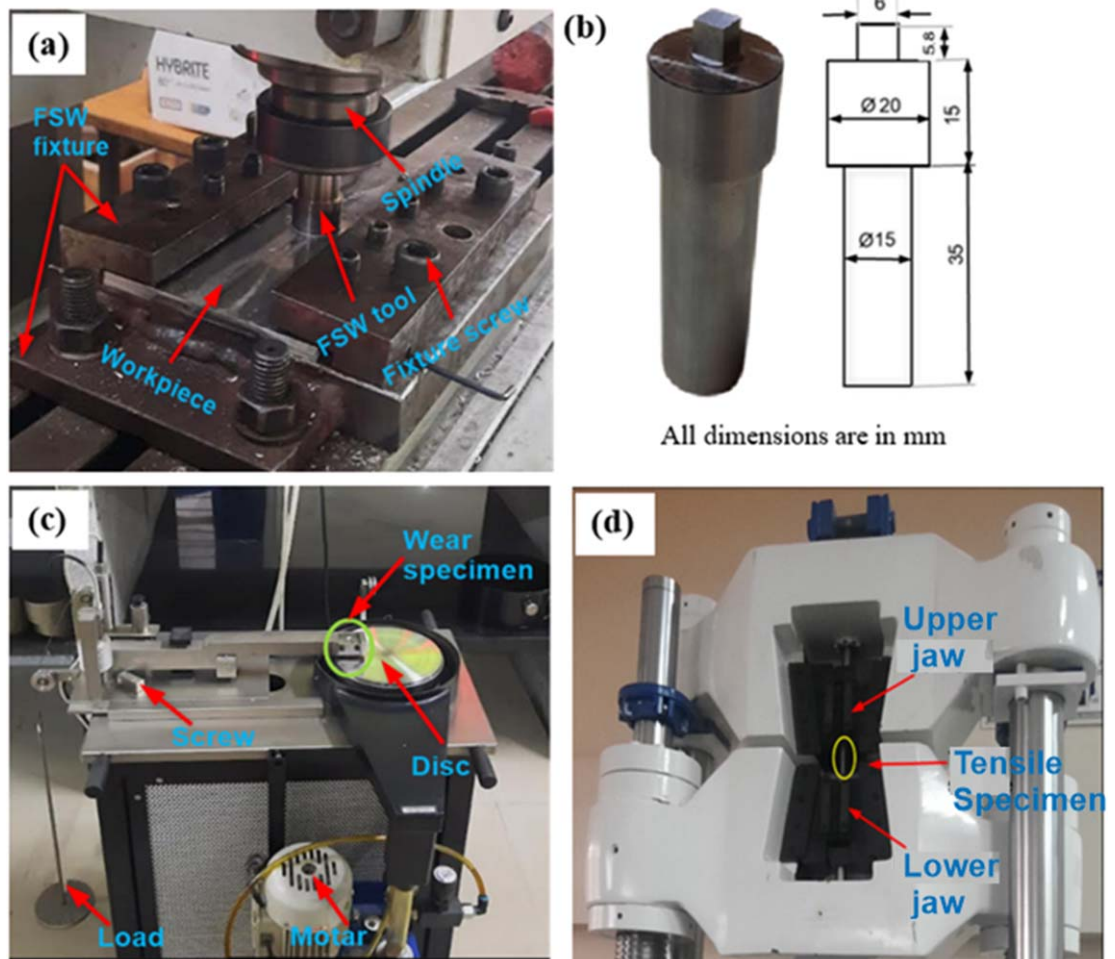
Experiments are carried out at (a) FSW setup; (b) FSW tool; (c) Pin on disc wear test setup; (d) Tensile test setup.
